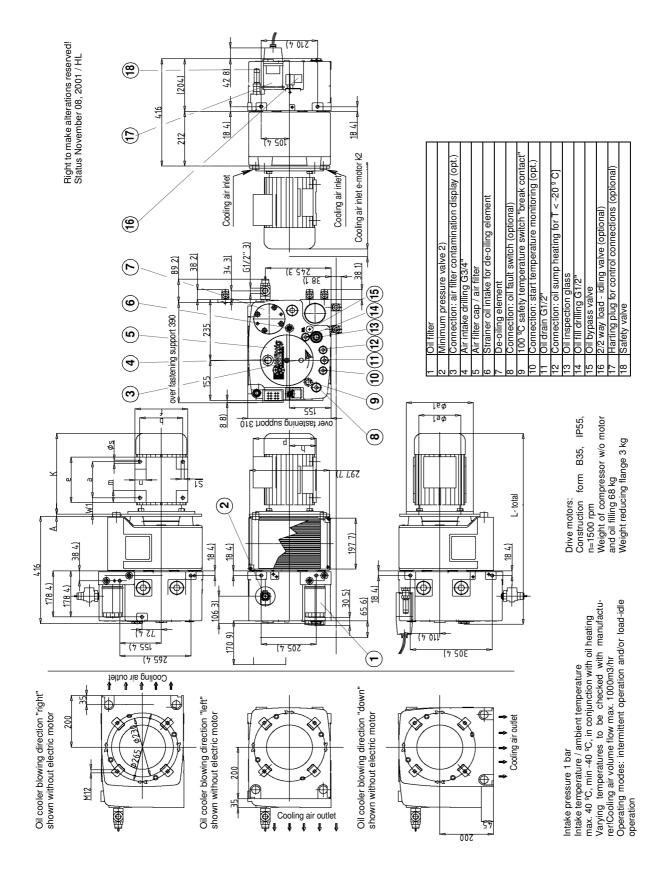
Dimensions for oil injection rotary compressor - type ROL 190/280/400/500/M
